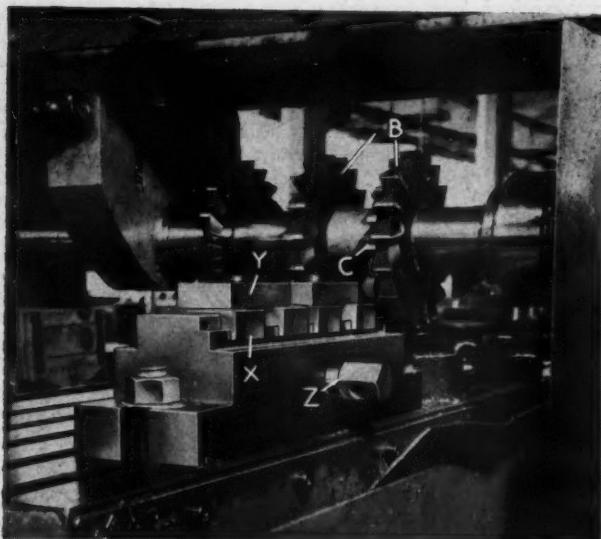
The set-up for the first milling stage on knife blocks. The fixture holds four blanks, which are secured by cam-operated strap clamps, and it is mounted at one end of the table of a machine arranged for pendulum milling
